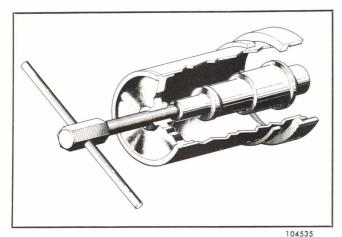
Turbine Front Bearing Sliding Ring Puller No. 2969
